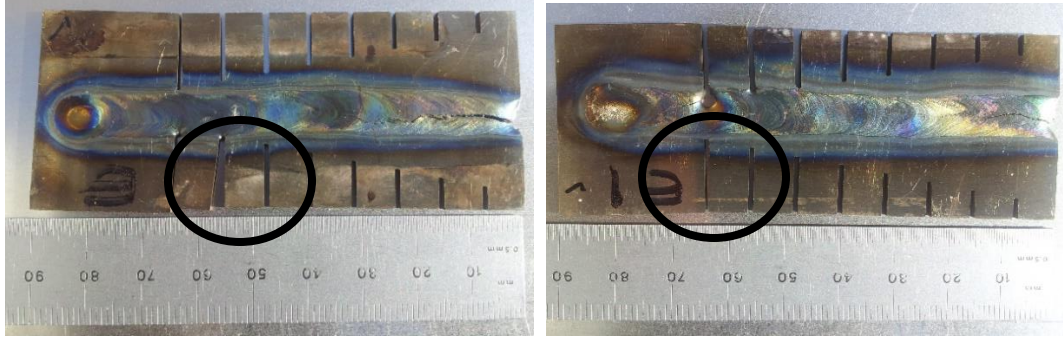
The welded sample of cracked E:0.4Ti;0.6Nb stabilized ferritic stainless steel during a welding speed of a) 6 mm/s and b) 3 mm/s showing a slightly rotated slotted material in a) more than in b) which have been circled.
